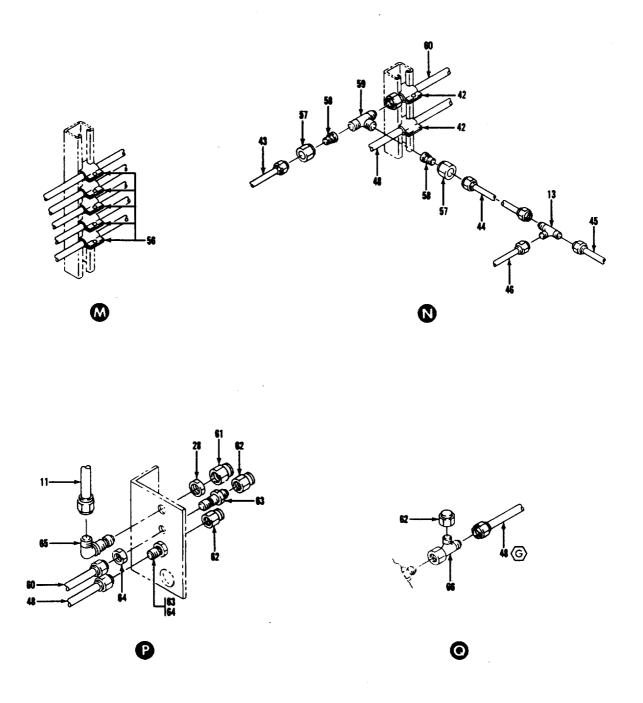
Tubing Installation (Sheet 5 of 17)
